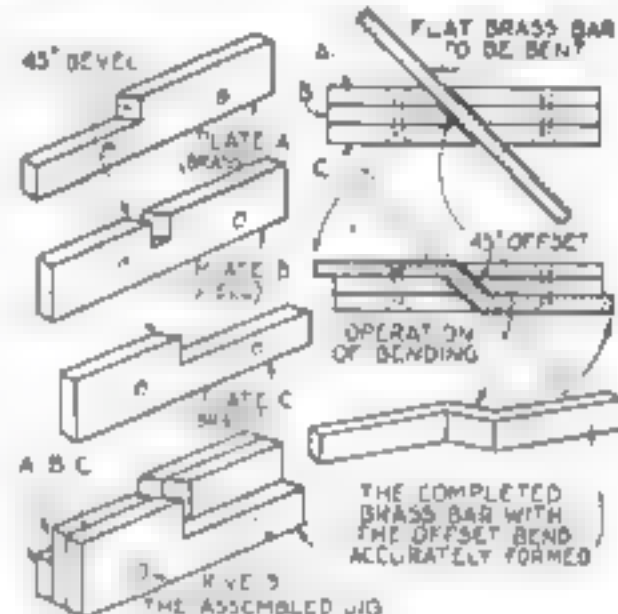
Inexpensive jig for making offset bends by hand in a number of small flat brass bars.
